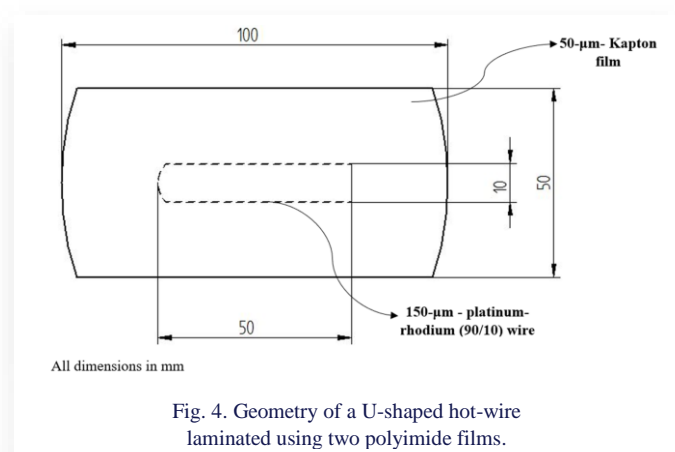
Geometry of a U-shaped hot-wire laminated using two polyimide films.
